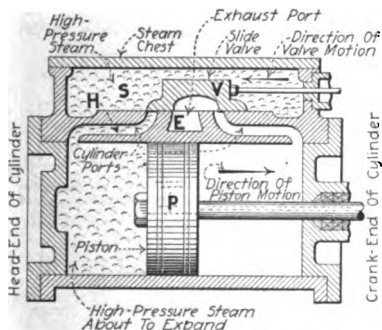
Point of head-end cut-off—steam supply from the steam chest has just been cut off from the head end of the cylinder.
